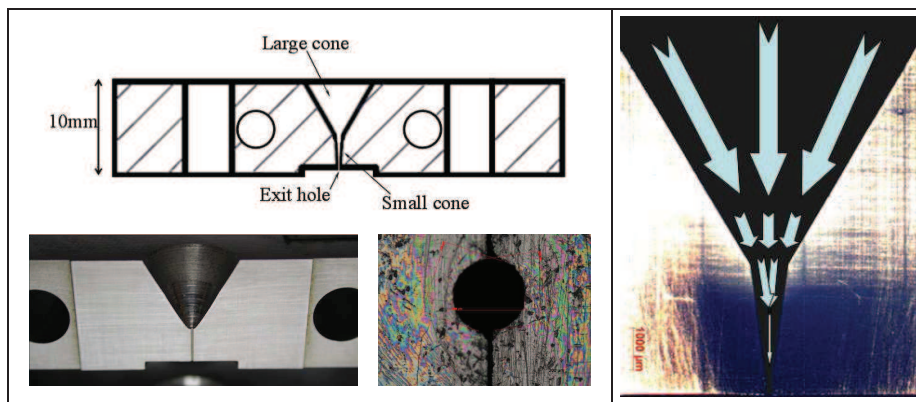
Example of a cross sectional drawing and pictures of one side of a coating nozzle and the closed exit hole (left), flow front of the coating material through the nozzle (right).
